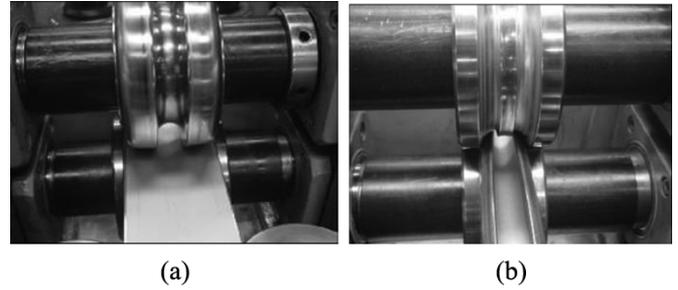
The breaker pass and fin pass for tube forming. (a) Breaker pass; (b) fin pass.
